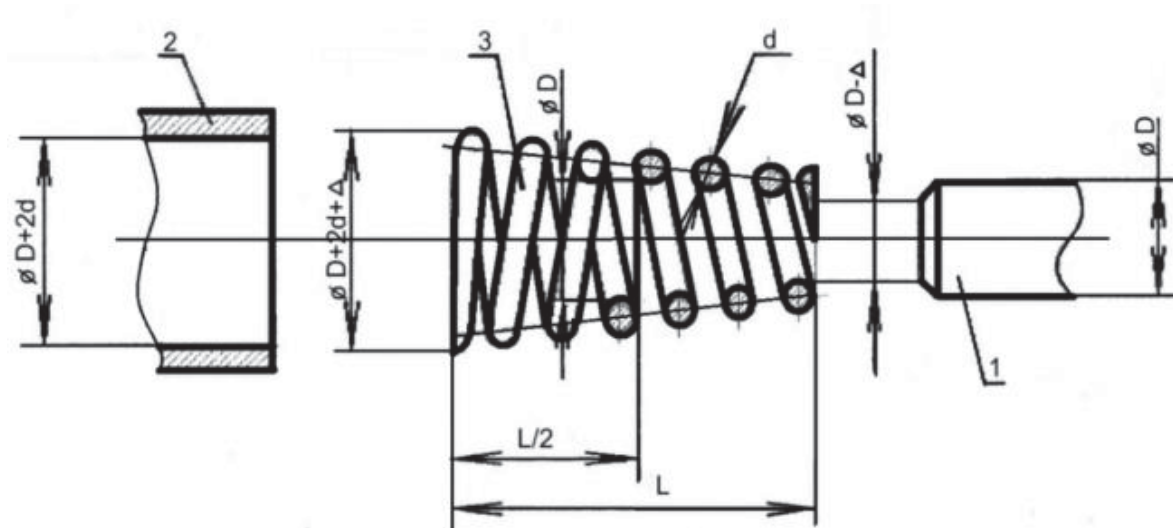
Conical sliding bearing for reciprocating rotary motion
